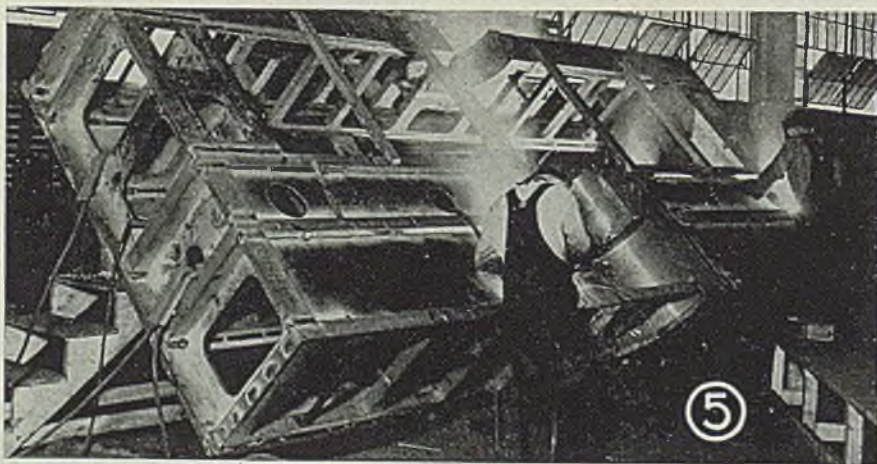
Fabricating framework for a marine gear housing. Unit is tilted for best welding position in making the many fillet welds with the electric arc
